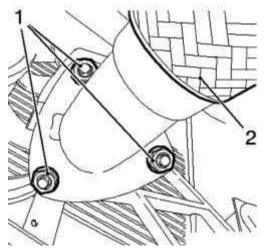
Front exhaust pipe: 1 - nuts, 2 - Exhaust
